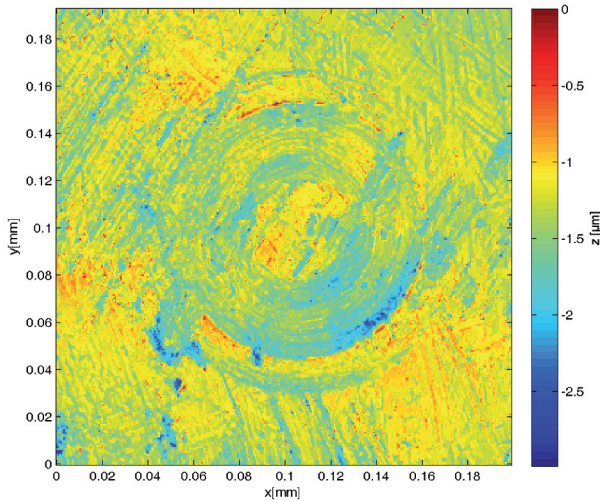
Surface topography after tool-workpiece contact for speed of 15 000 RPM and 0.127 mm tool diameter
